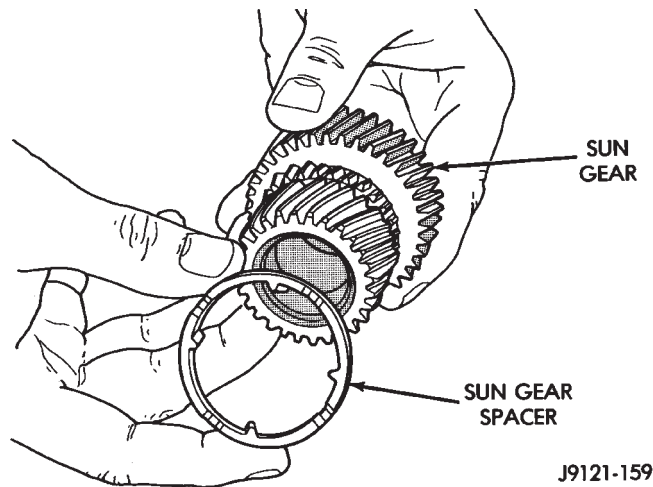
Installing Spacer And Thrust Plate On Sun Gear (42RH)
